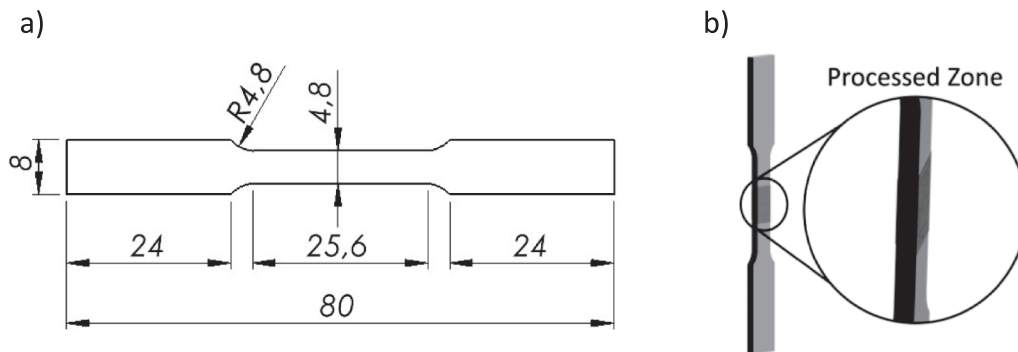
Uniaxial tensile test sample: a) schematic drawing with dimensions in mm; b) processed zone closeup.
